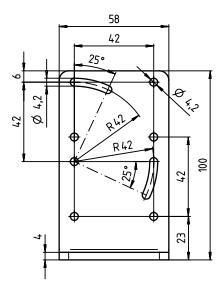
Dimensioned drawing BTU 0300M-W mounting device
